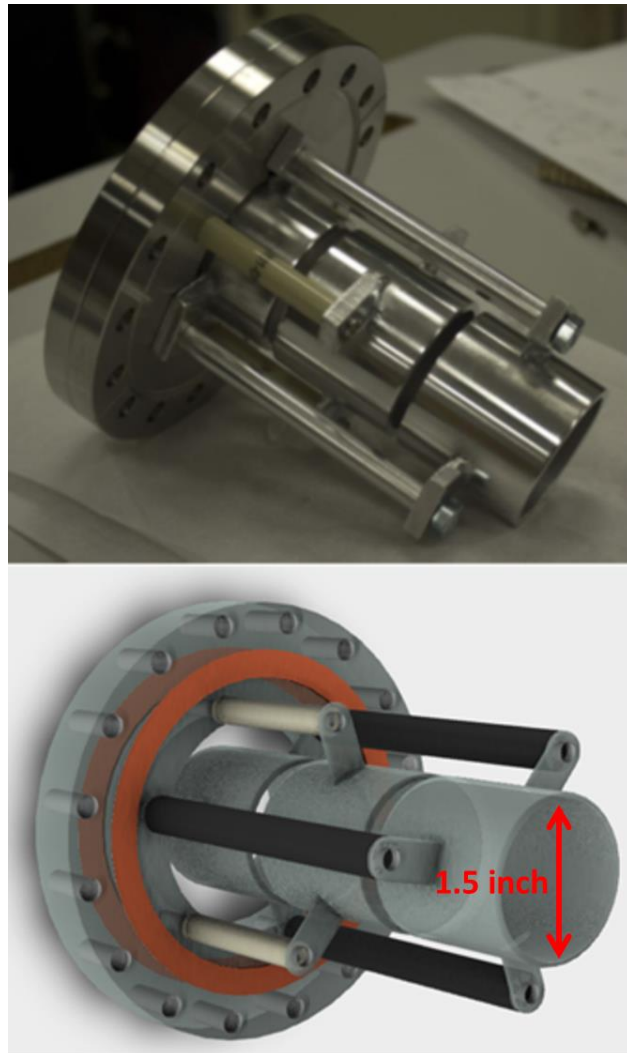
Image of the completed Einzel lens assembly and its AutoCad drawing.
